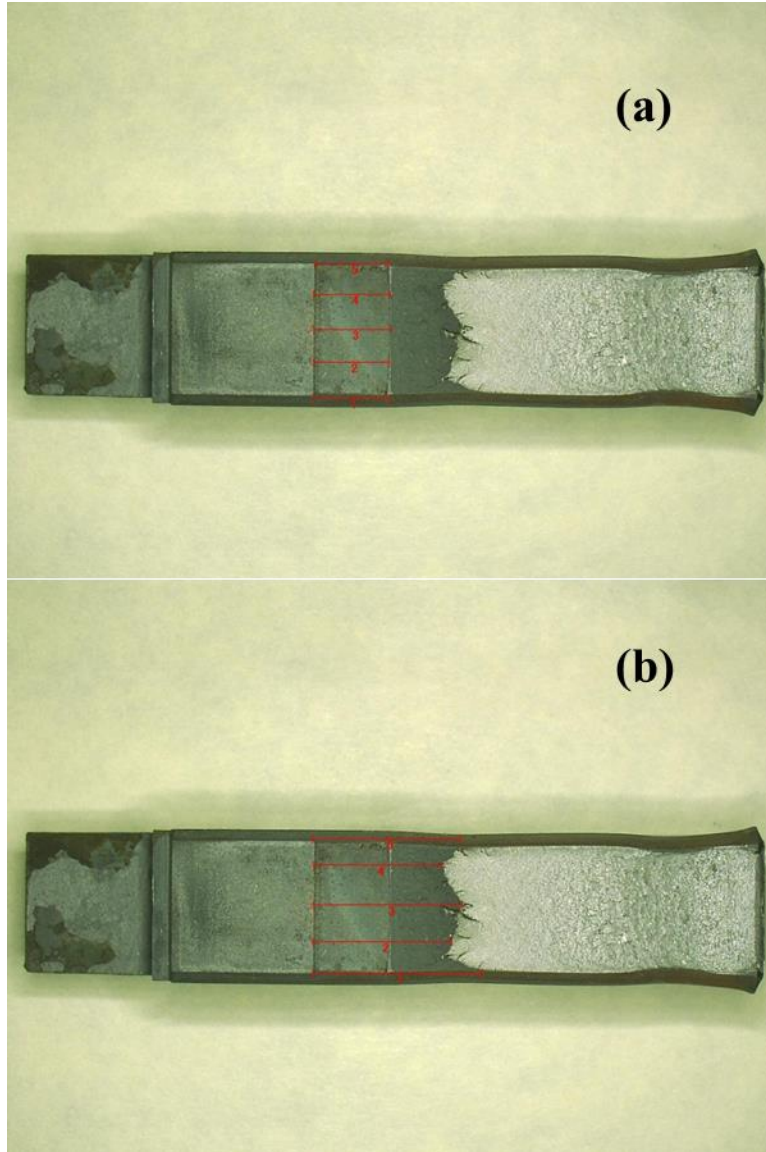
Crack extension (≈ 11 mm) in a 60 seconds hold time test. (a) pre-crack, (b) final crack length. Courtesy of WMTR, Youngstown, PA.
